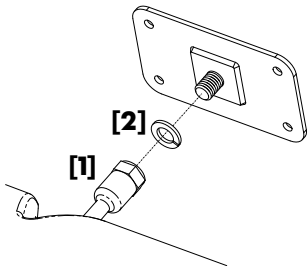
Attaching accessories to the mounting arm [1] using the spring washer [2]
